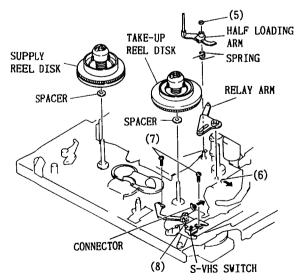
Supply/Take-up Reel Disks, Half Loading Arm, Relay Arm and S-VHS Switch
